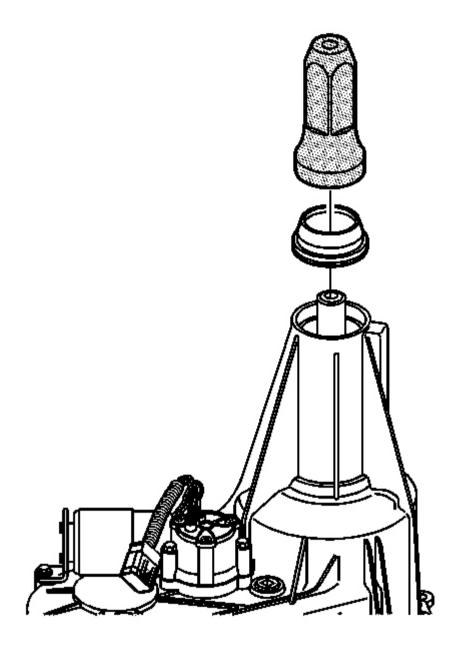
Installing Rear Output Shaft Seal Courtesy of GENERAL MOTORS CORP.
